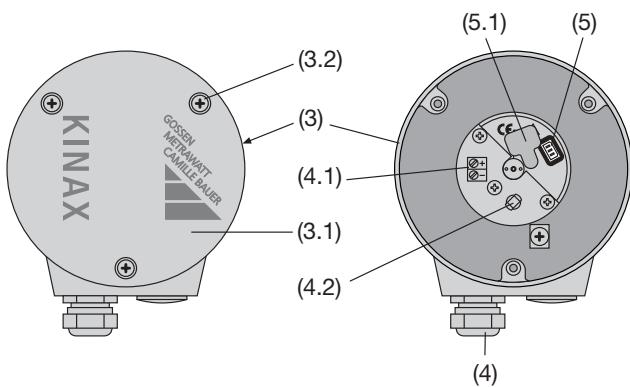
Rear (3) with terminals (4.1) and cable glands (4).
